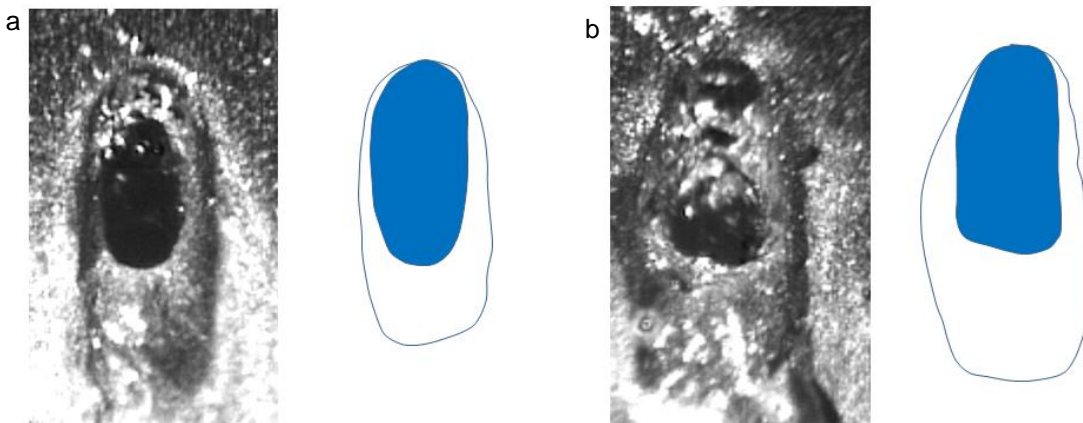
Vapor capillary shape welding CuZn37 at (a) CuZn20 (b) CuZn10 at 3 kW and 100 mm/s
